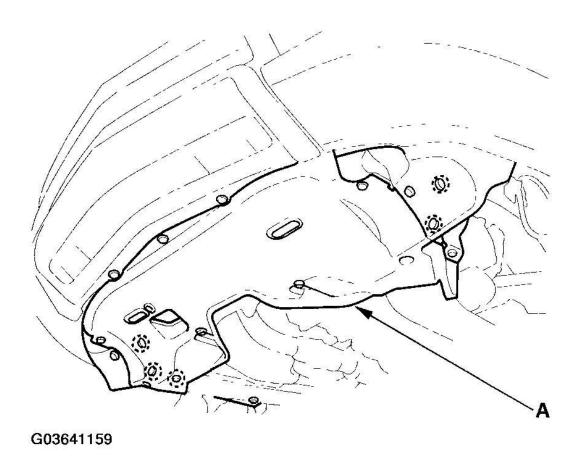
Installing Splash Shield Courtesy of AMERICAN HONDA MOTOR CO., INC.
